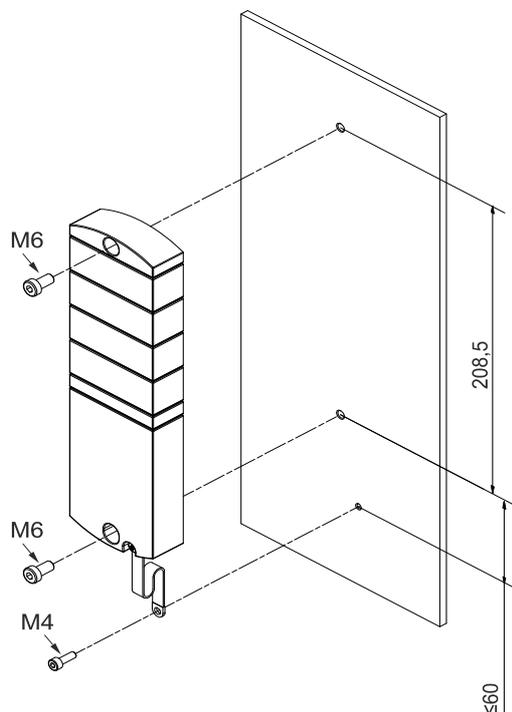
Fasten device. Dimensions in mm (figure similar)
